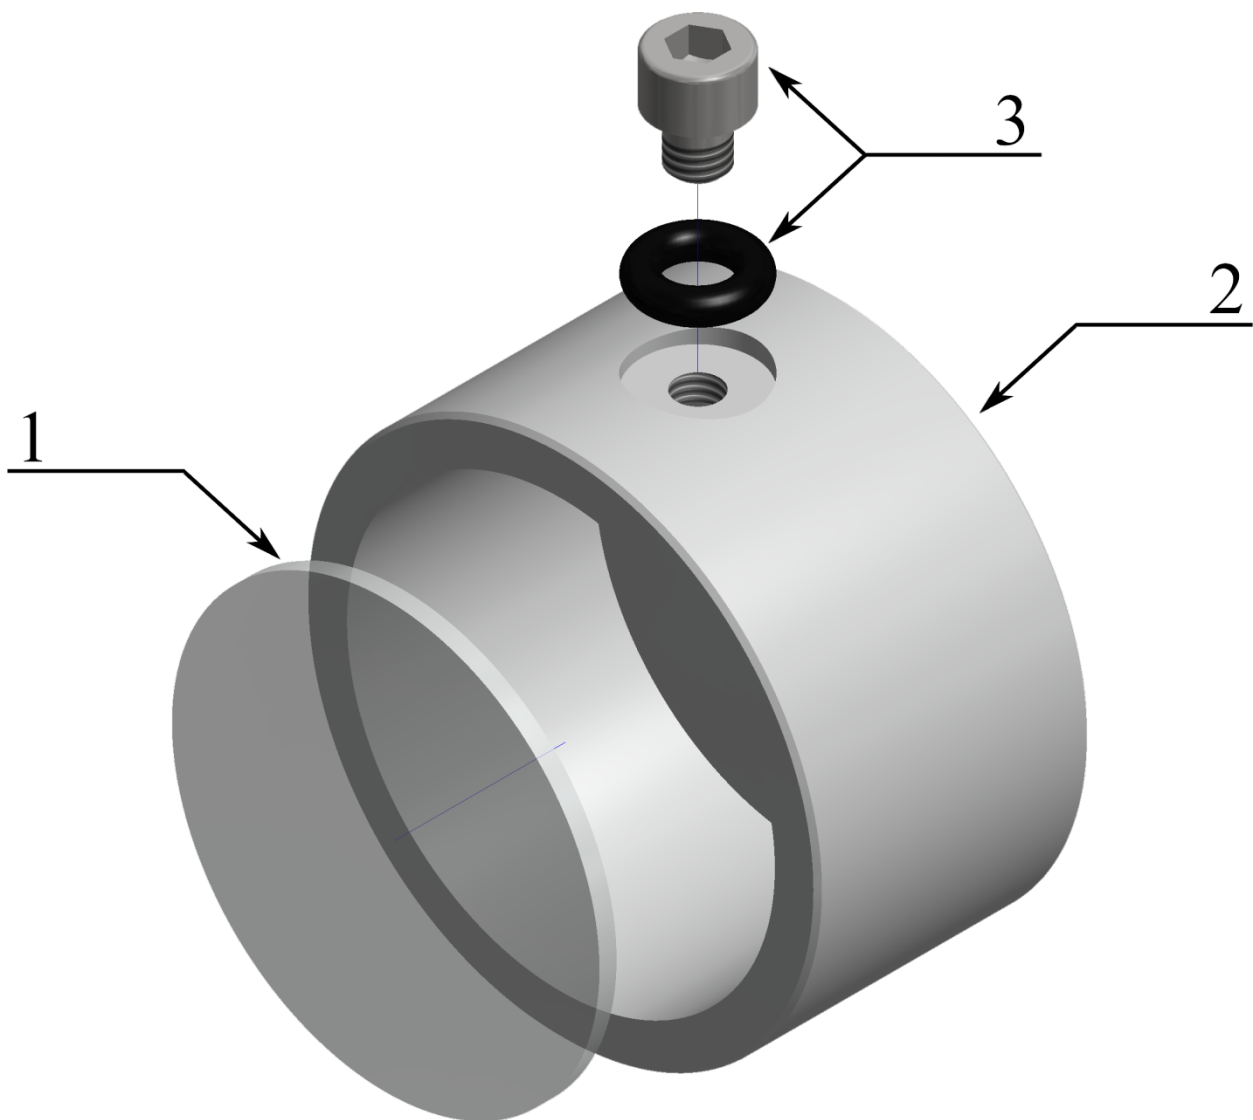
Exploded view of the container designed for the liquid scintillator. 1 – Quartz window, 2 – Aluminum container, 3 – Sealing screw.
